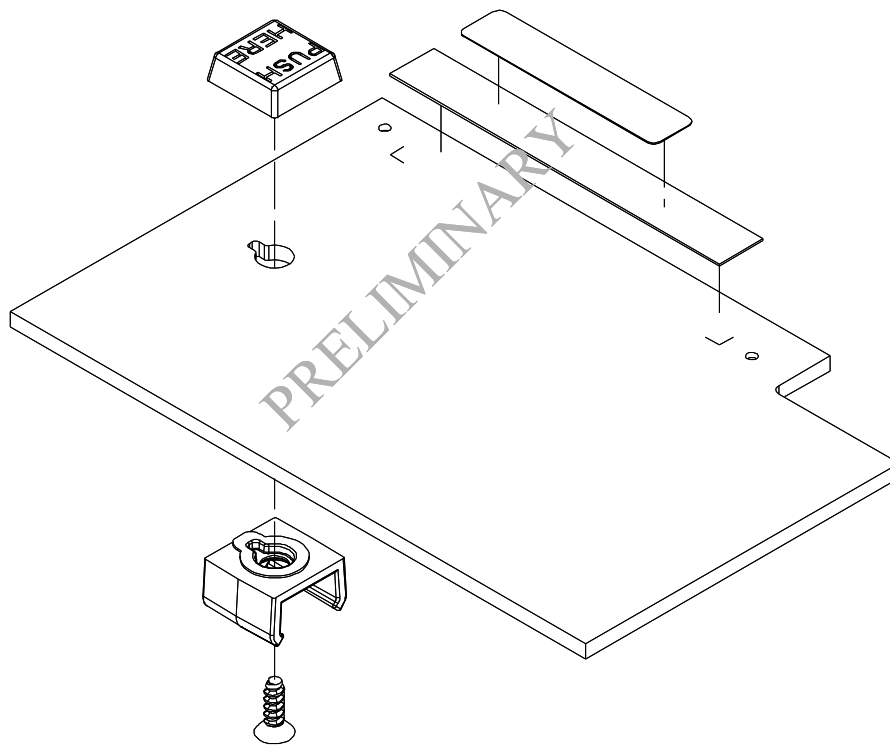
CIOv I/O Expansion Card (CIOv) – isometric view - exploded
